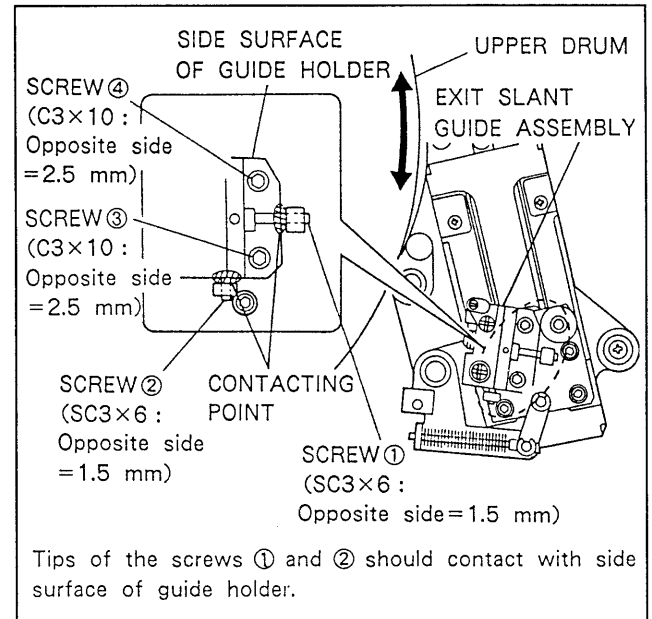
Exit Slant Guide Assembly Replacement
